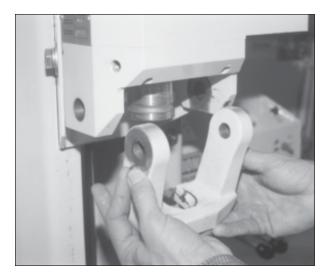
Bottom plate latch extensions should correspond with spring cavity in hammer latch.
